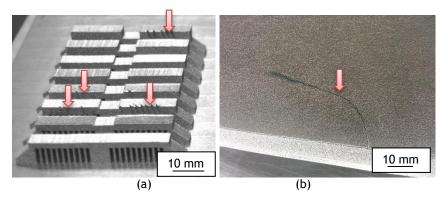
Defects of the DMLS samples (a) and macro-cracks (b).
